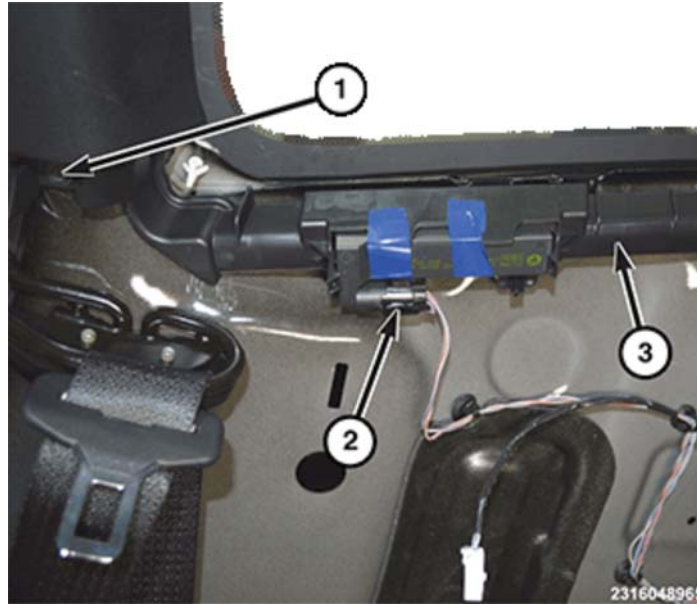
Screw, Wire Harness Connector & Quarter Trim Upper Panel
